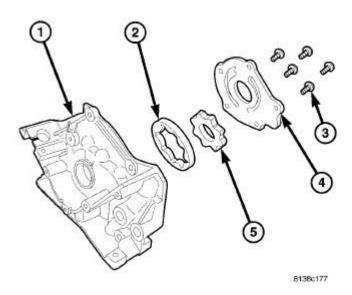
Oil Pump Assembly Courtesy of CHRYSLER LLC
